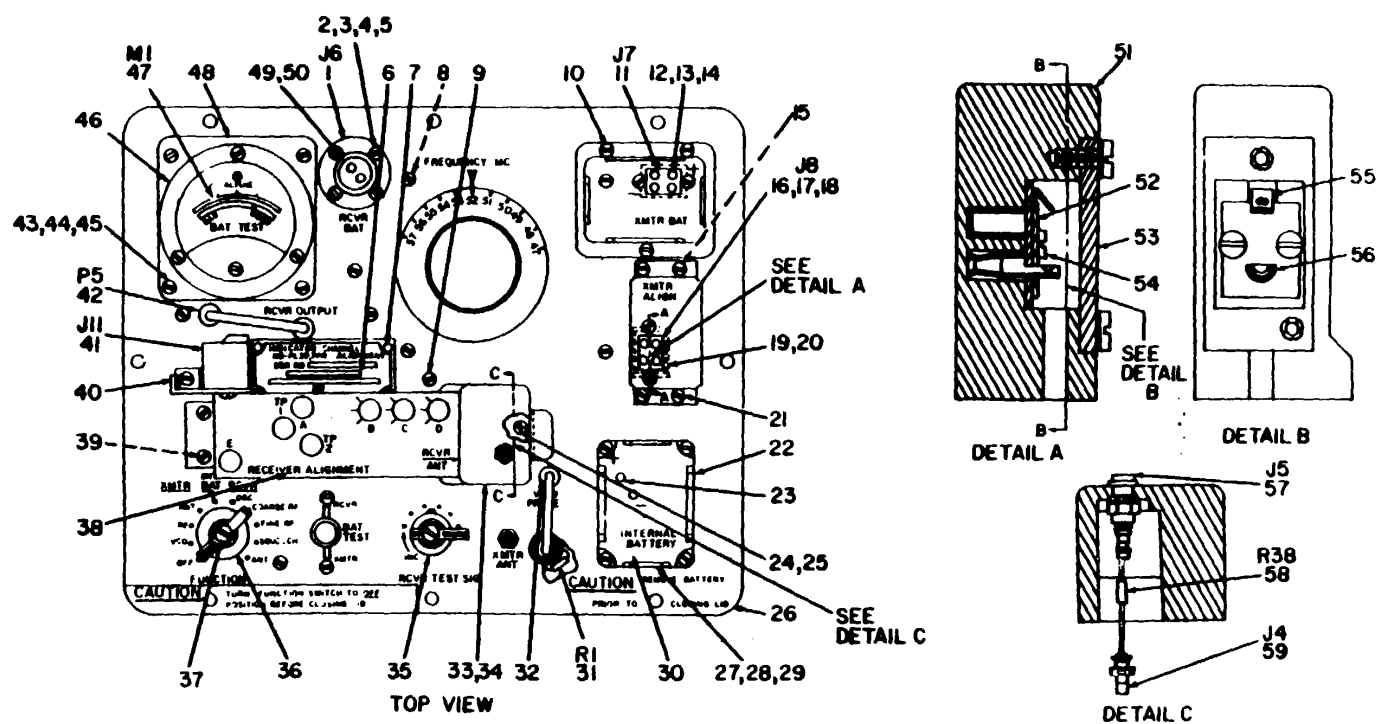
Top Plate Assembly (Sheet 1 of 2).
